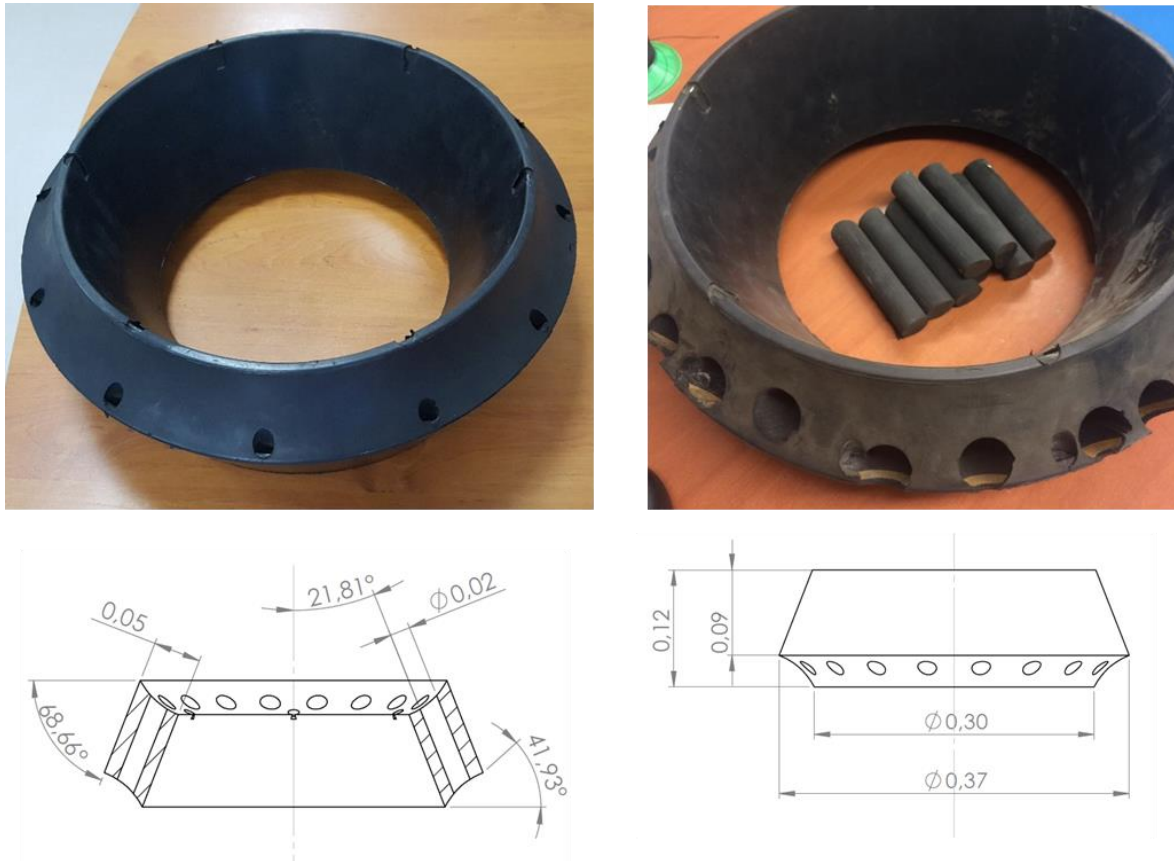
T200 rubber part with wangle sampled and related dimensioning drawings
